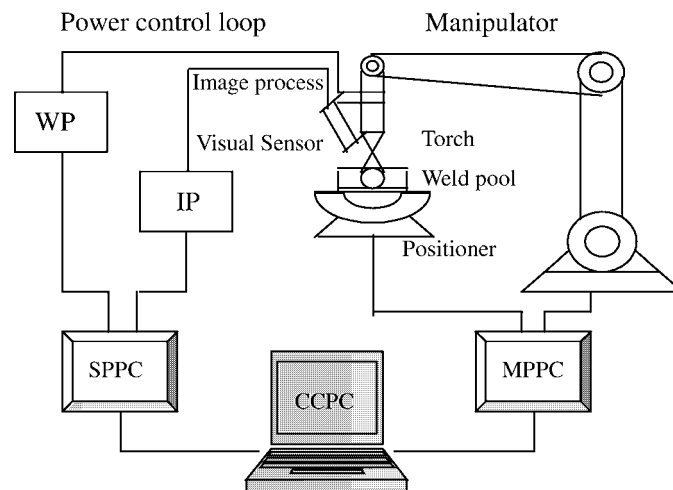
Structure diagram of weld pool sensing and control system during robotic-pulsed GTAW.
